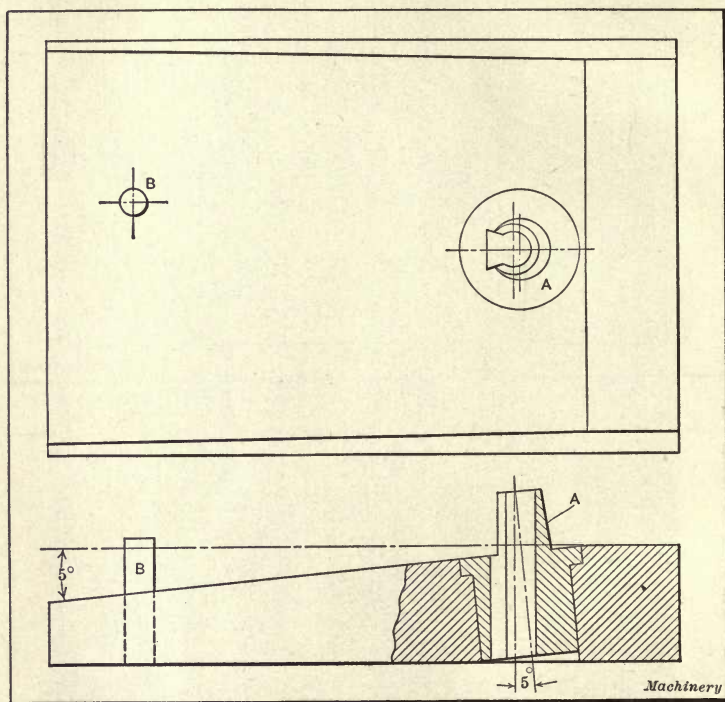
Fixture for Holding Bicycle Crank while Broaching Keyway
